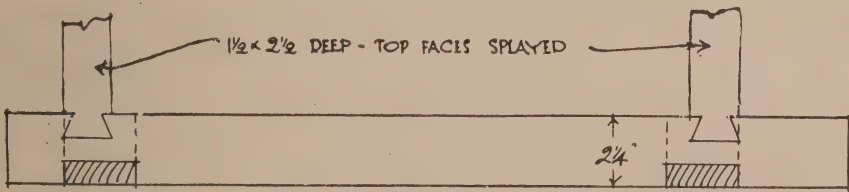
Detail Plan of Hood of Seat at A (Fig. 91)
